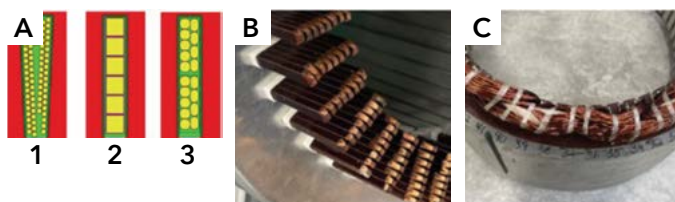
(a) Stator rectangular winding layout, (b) Hairpin joint, (c) Hairpin welds on rectangular lap winding
